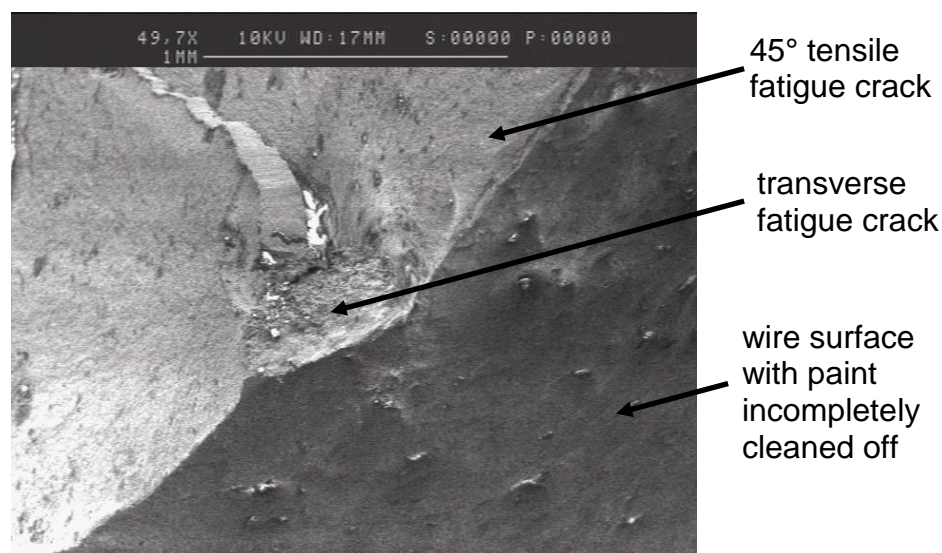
transverse shear crack at origin with the 45° fatigue cracking initiated either side of the transverse shear fatigue crack
